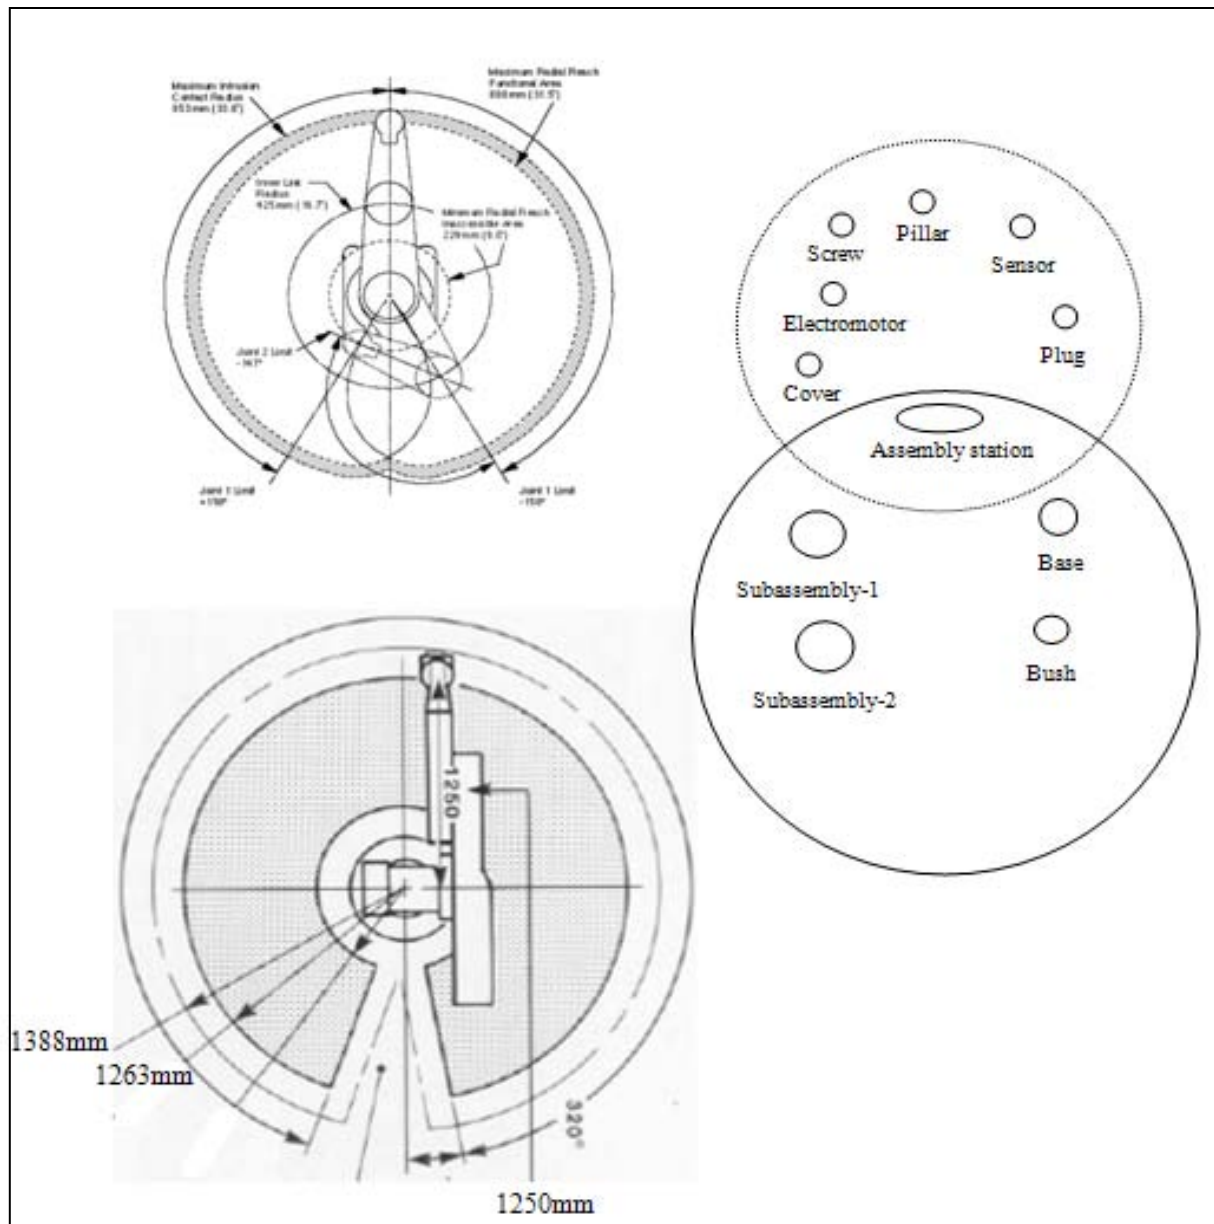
Workcell-3 for driver assembly with Adept-one and Puma-762 Robot
